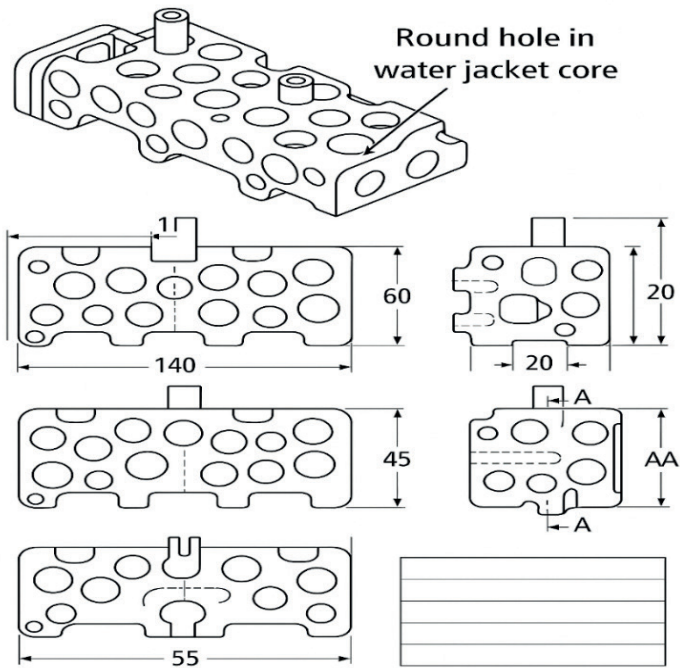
CAD model and detailed engineering drawing of a cylinder head showing orthographic views with standard dimensions
